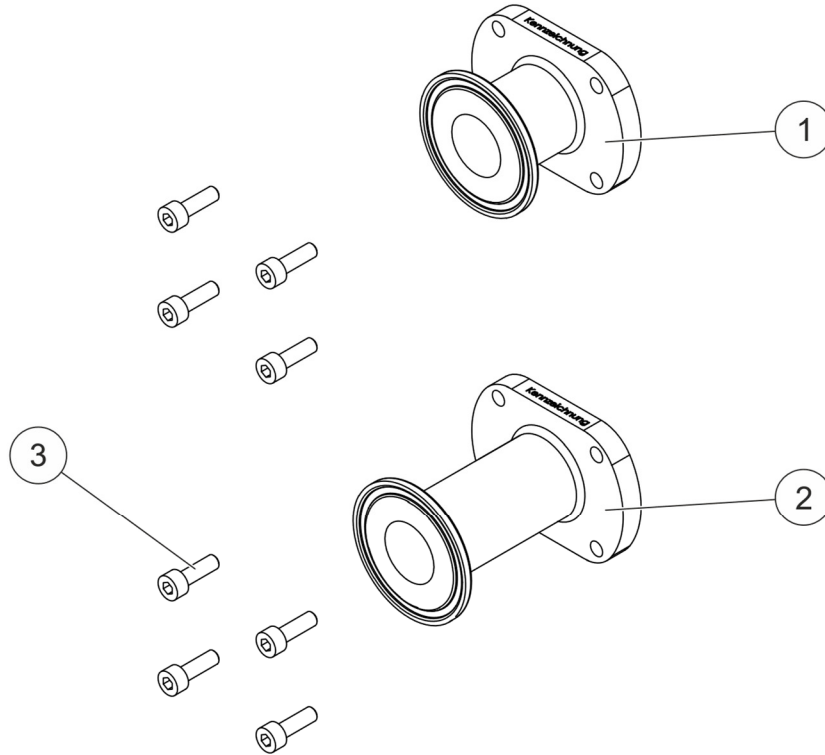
Sub-assembly connecting nozzle PQ25U-EX
